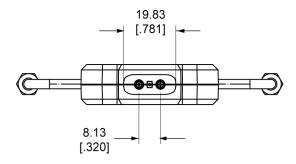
MX0105A Dimensions (All dimensions are in mm[inches])
